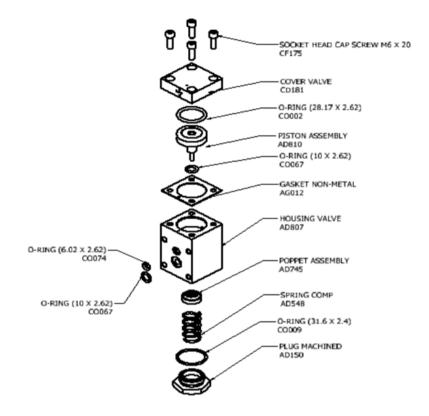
Exploded view of exhaust valve of Dryspell Plus model 10
